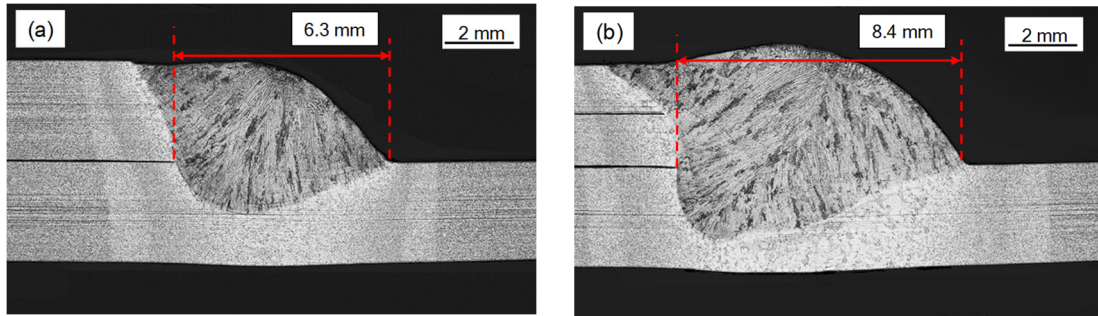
Cross-sectional image of the weld: (a) S and (b) L.
